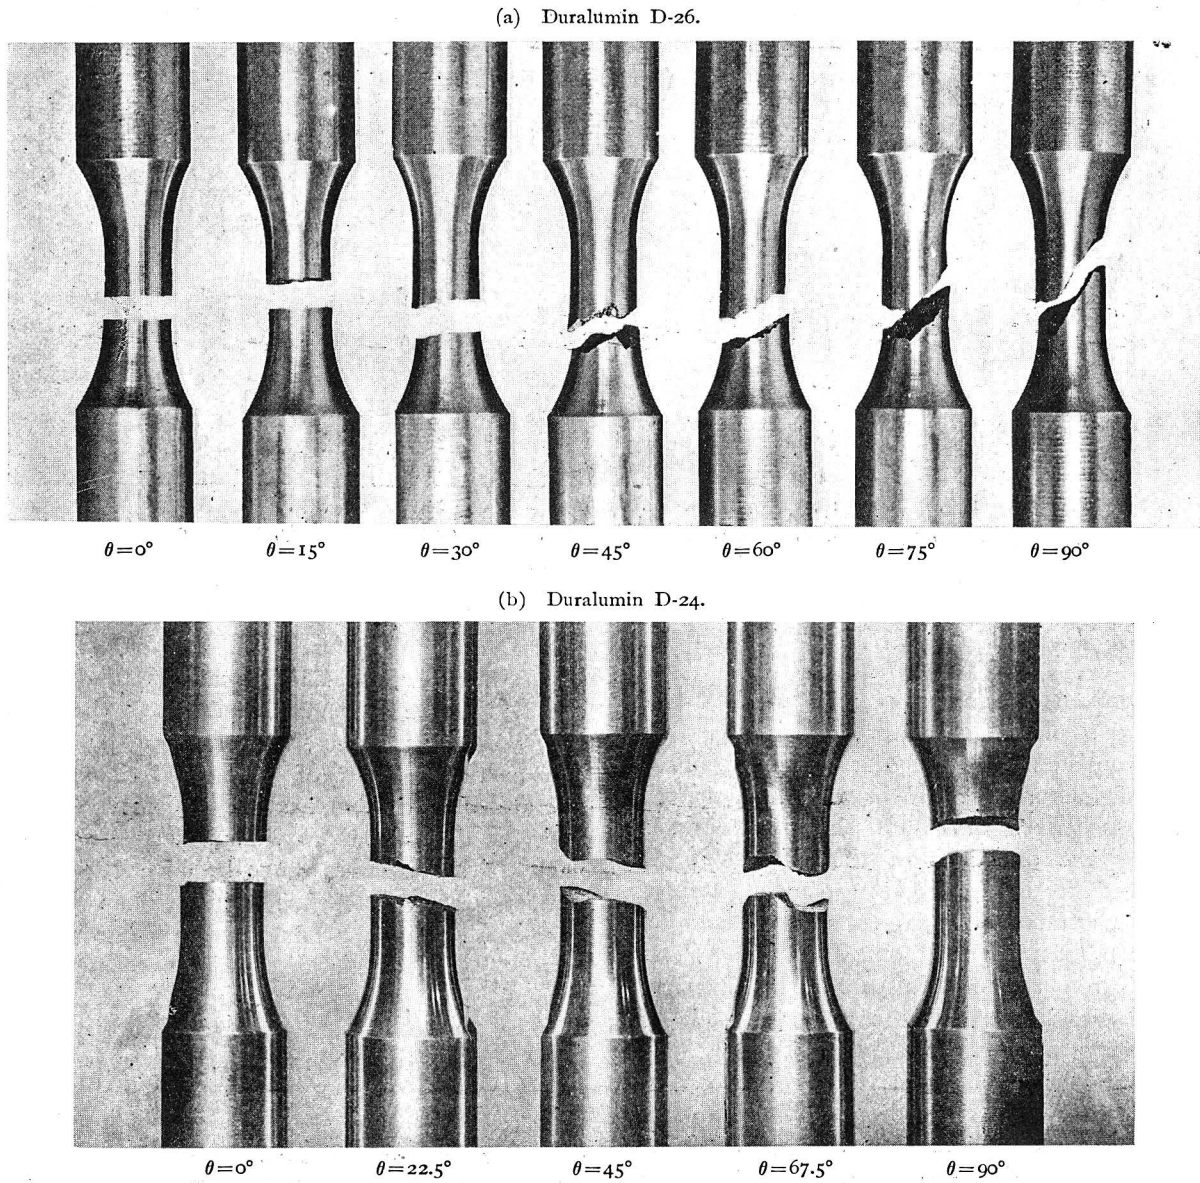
Fatigue Fractures of Duralumins.
